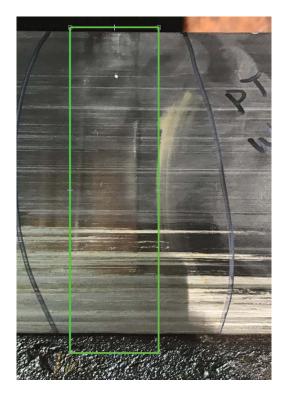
Bottom Ring Wearing Ring Split Welds
